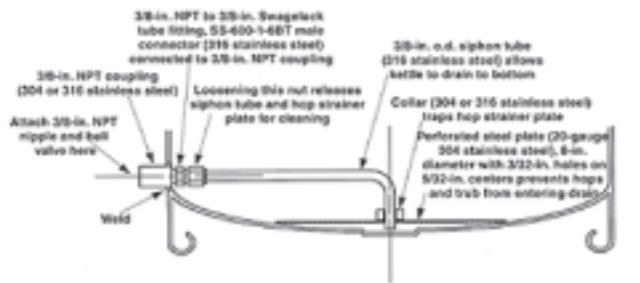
Schematic showing key components and assembly of the modified half-barrel keg bottom.
